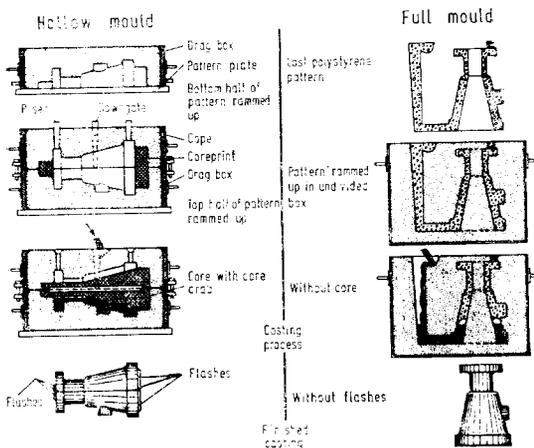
Moulding and casing process in conventional casting and casting with lost patterns
